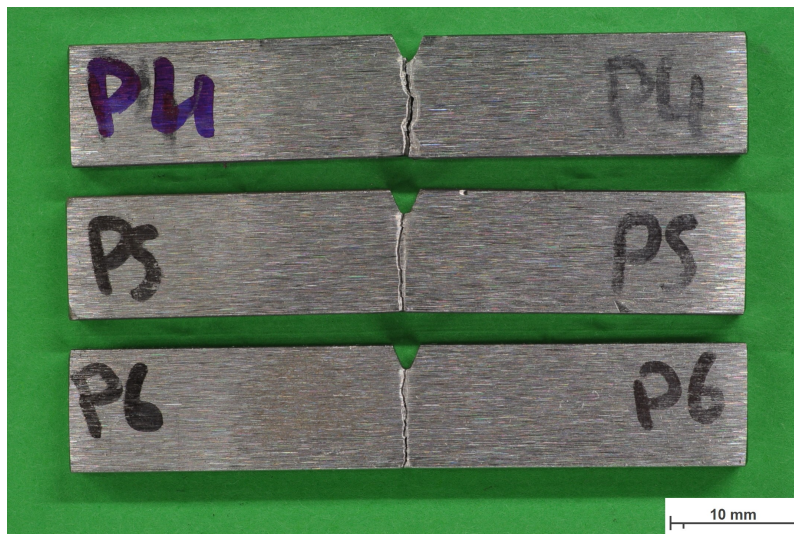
Butt weld EBLPWHT (P) Charpy V-notch samples after applying impact test at -40°C .
